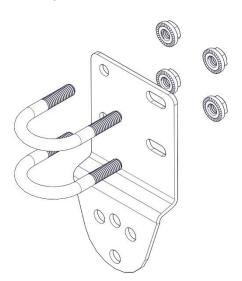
Insert pipe, then fully tighten all U-bolt hardware, ensuring that pipe bottoms out on strut plate.
